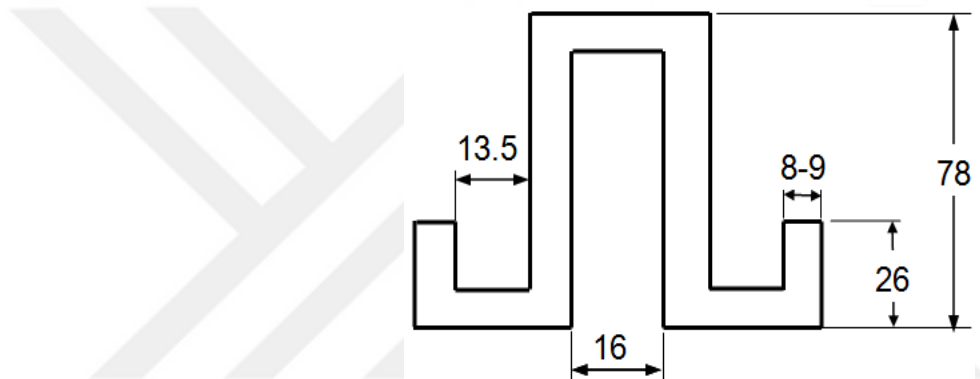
35. Shows the real deposited part dimensions after the deposition process (dimensions are in mm).
